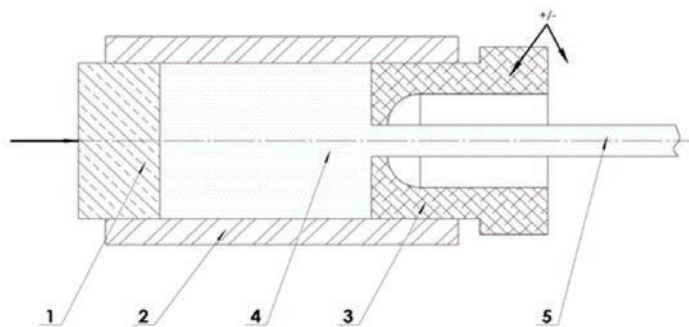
Schematic diagram of the extrusion process by KOBO® method: 1 – punch, 2 – container, 3 – reversed twisted die, 4 – stock, 5 – extruded rod
